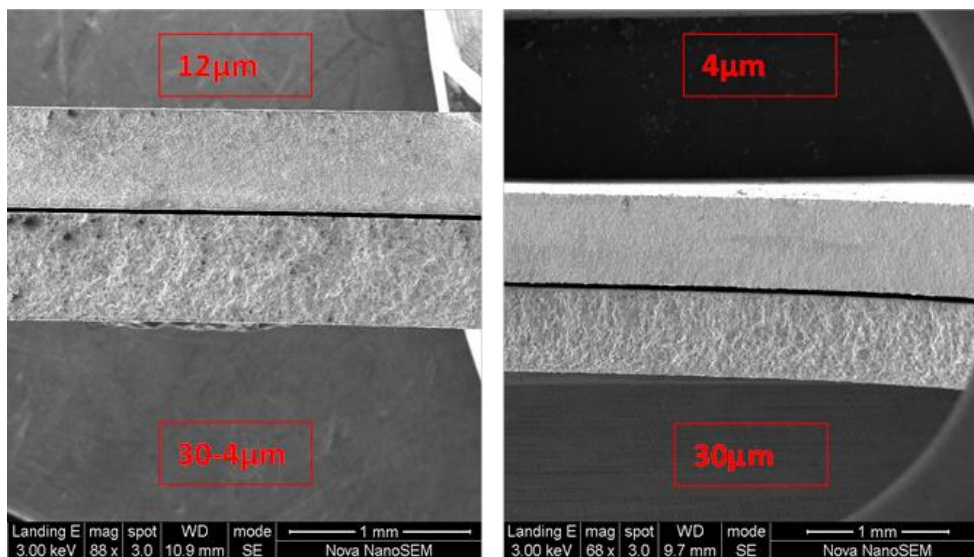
Collage depicting the fracture surface of the four specimens of the four grades tested, highlighting the difference in the appearance of the tortuosity/relief of the fracture surface.
